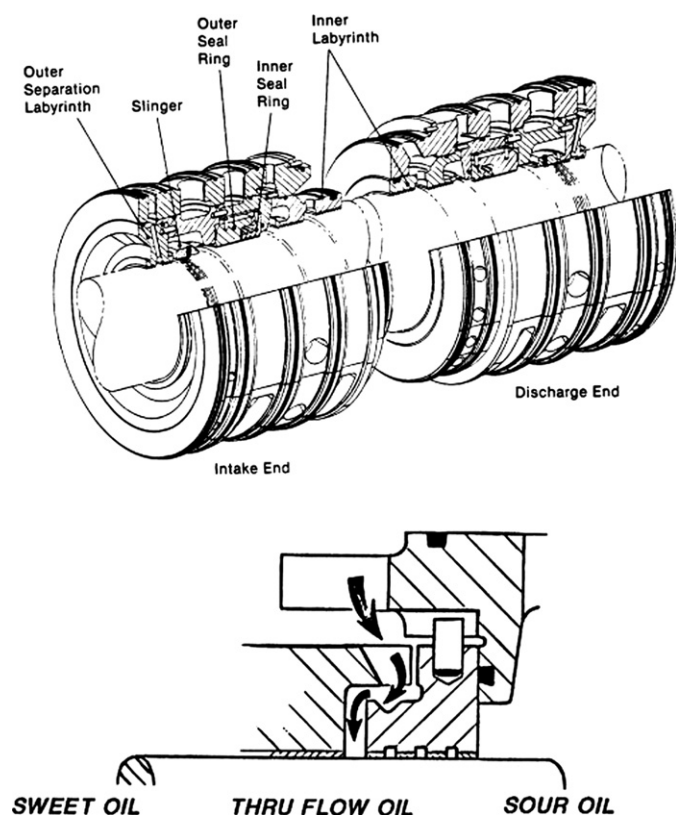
• Bushing seal — top: oil film seal; bottom: seal oil flow (Courtesy of Dresser-Rand)
